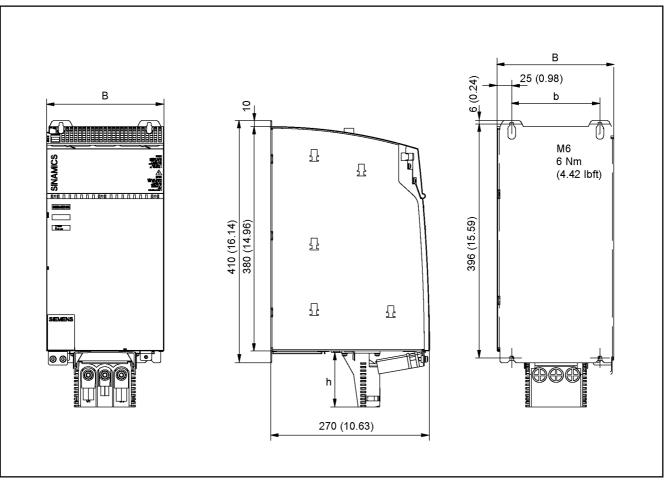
Dimension drawing of Active Line Module with internal air cooling (36 kW and 55 kW)
